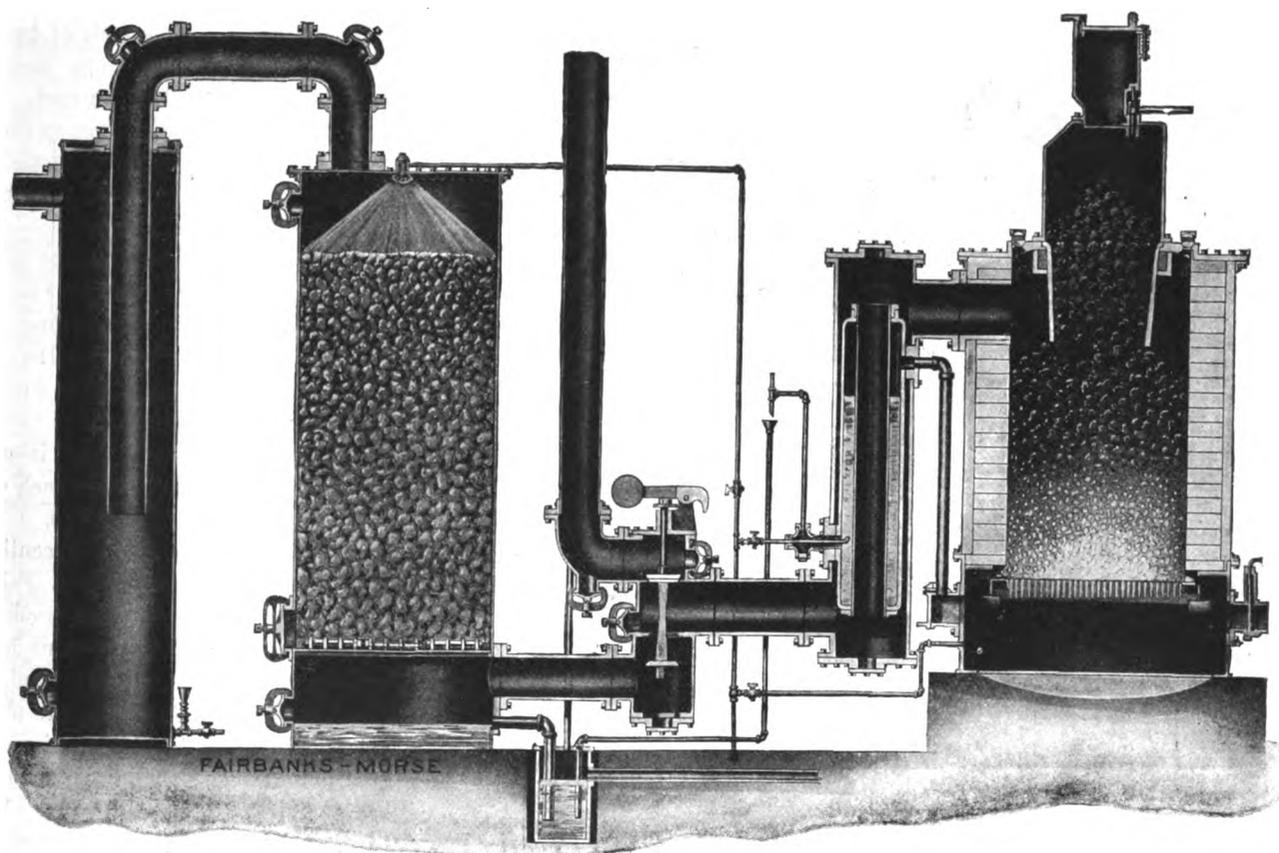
SECTIONAL VIEW OF FAIRBANKS-MORSE SUCTION GAS PRODUCER.
